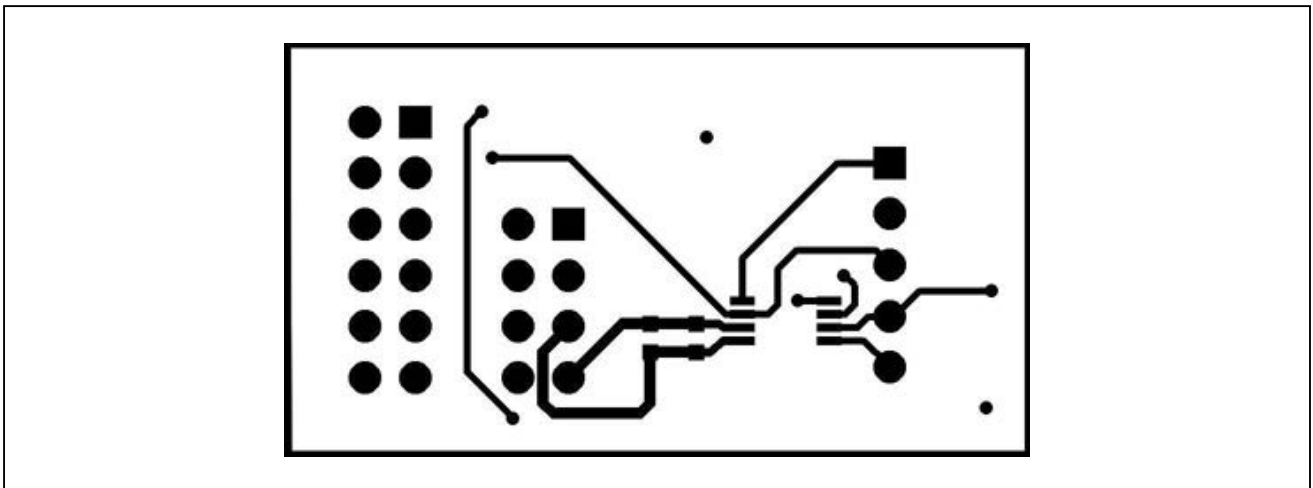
DS1086LPMB11 Peripheral Module PCB Layout—Component Side
